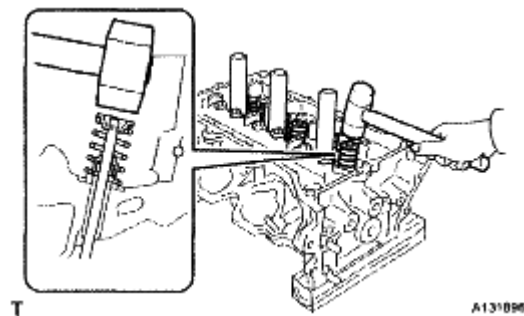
Tapping Valve Stem Tip To Ensure Proper Fit
